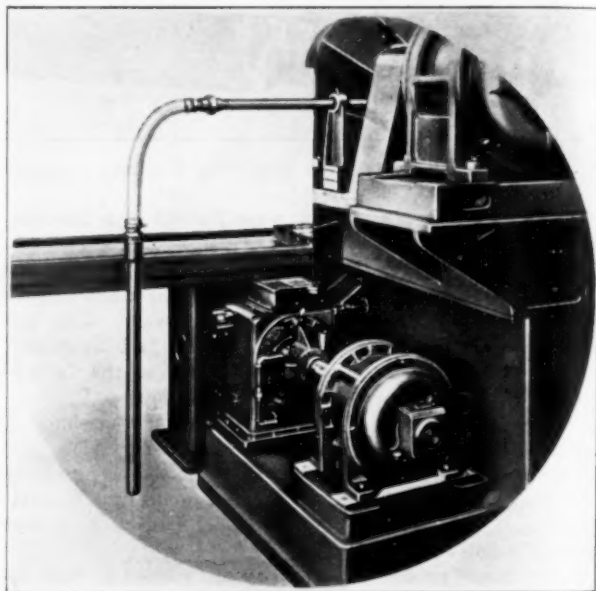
HYDRAULIC PUMP ON GRINDING MACHINE
